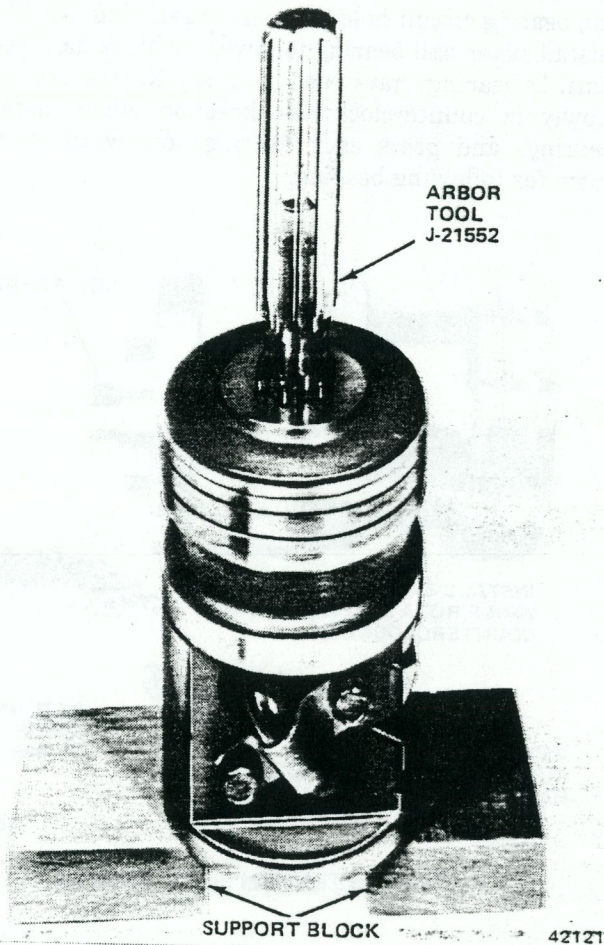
L-36 Arbor Tool Installed in Rack Piston
